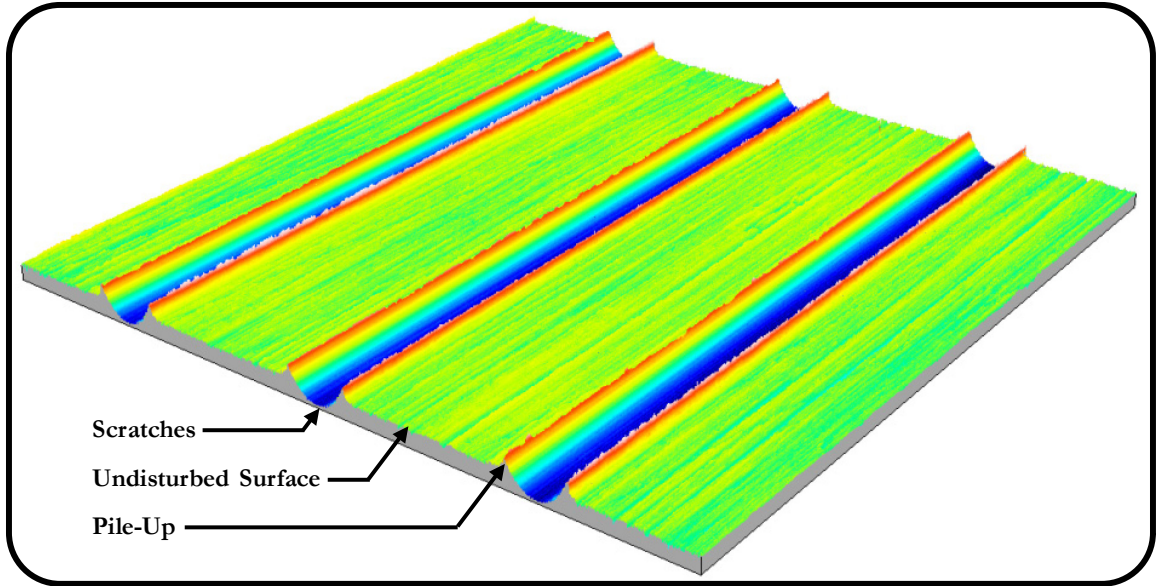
Representative three-dimensional scan workpiece surface.
